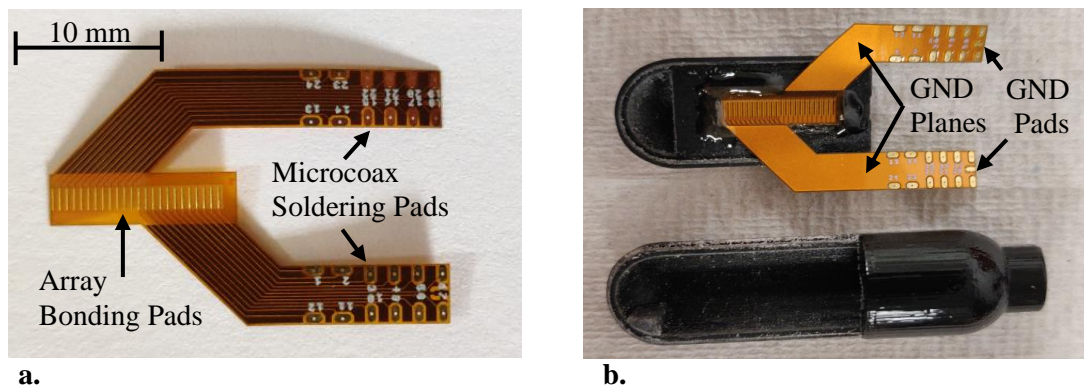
a. Top View of the Flexi PCB; b. Bottom View of the Flexi PCB Bonded to the Array and to the Capsule Casing
